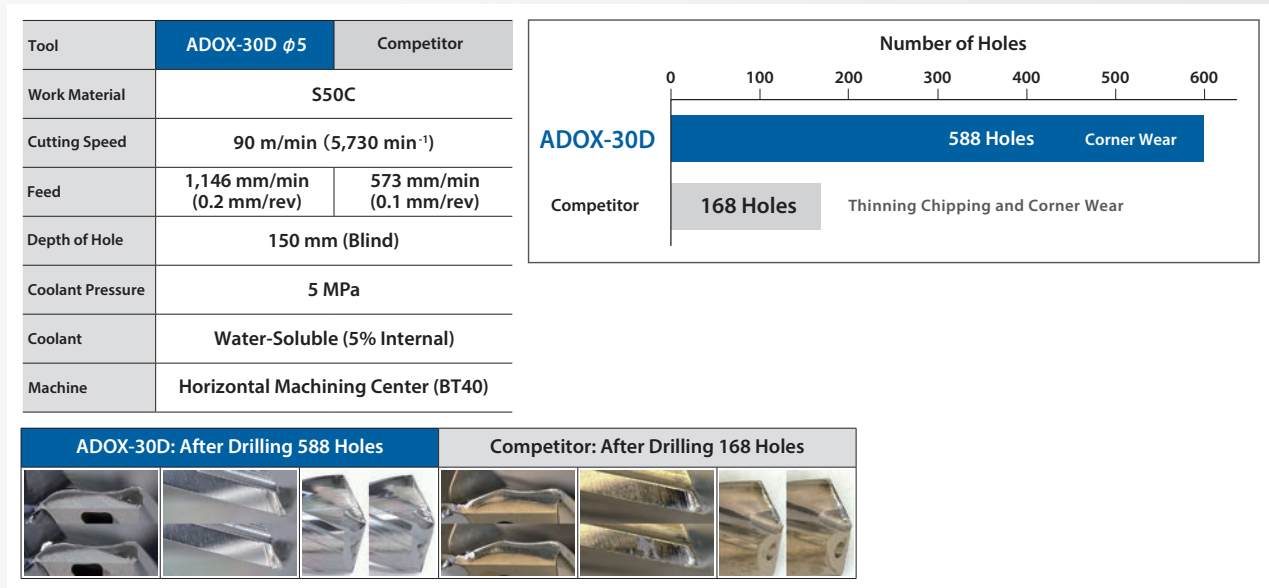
High efficiency and long tool life in 30D deep hole drilling.
